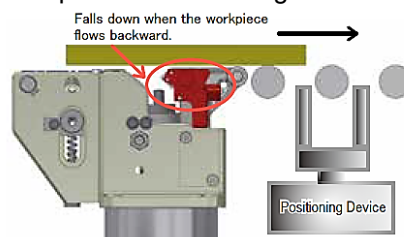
Workpiece Backward Flow with Mechanical Stop
